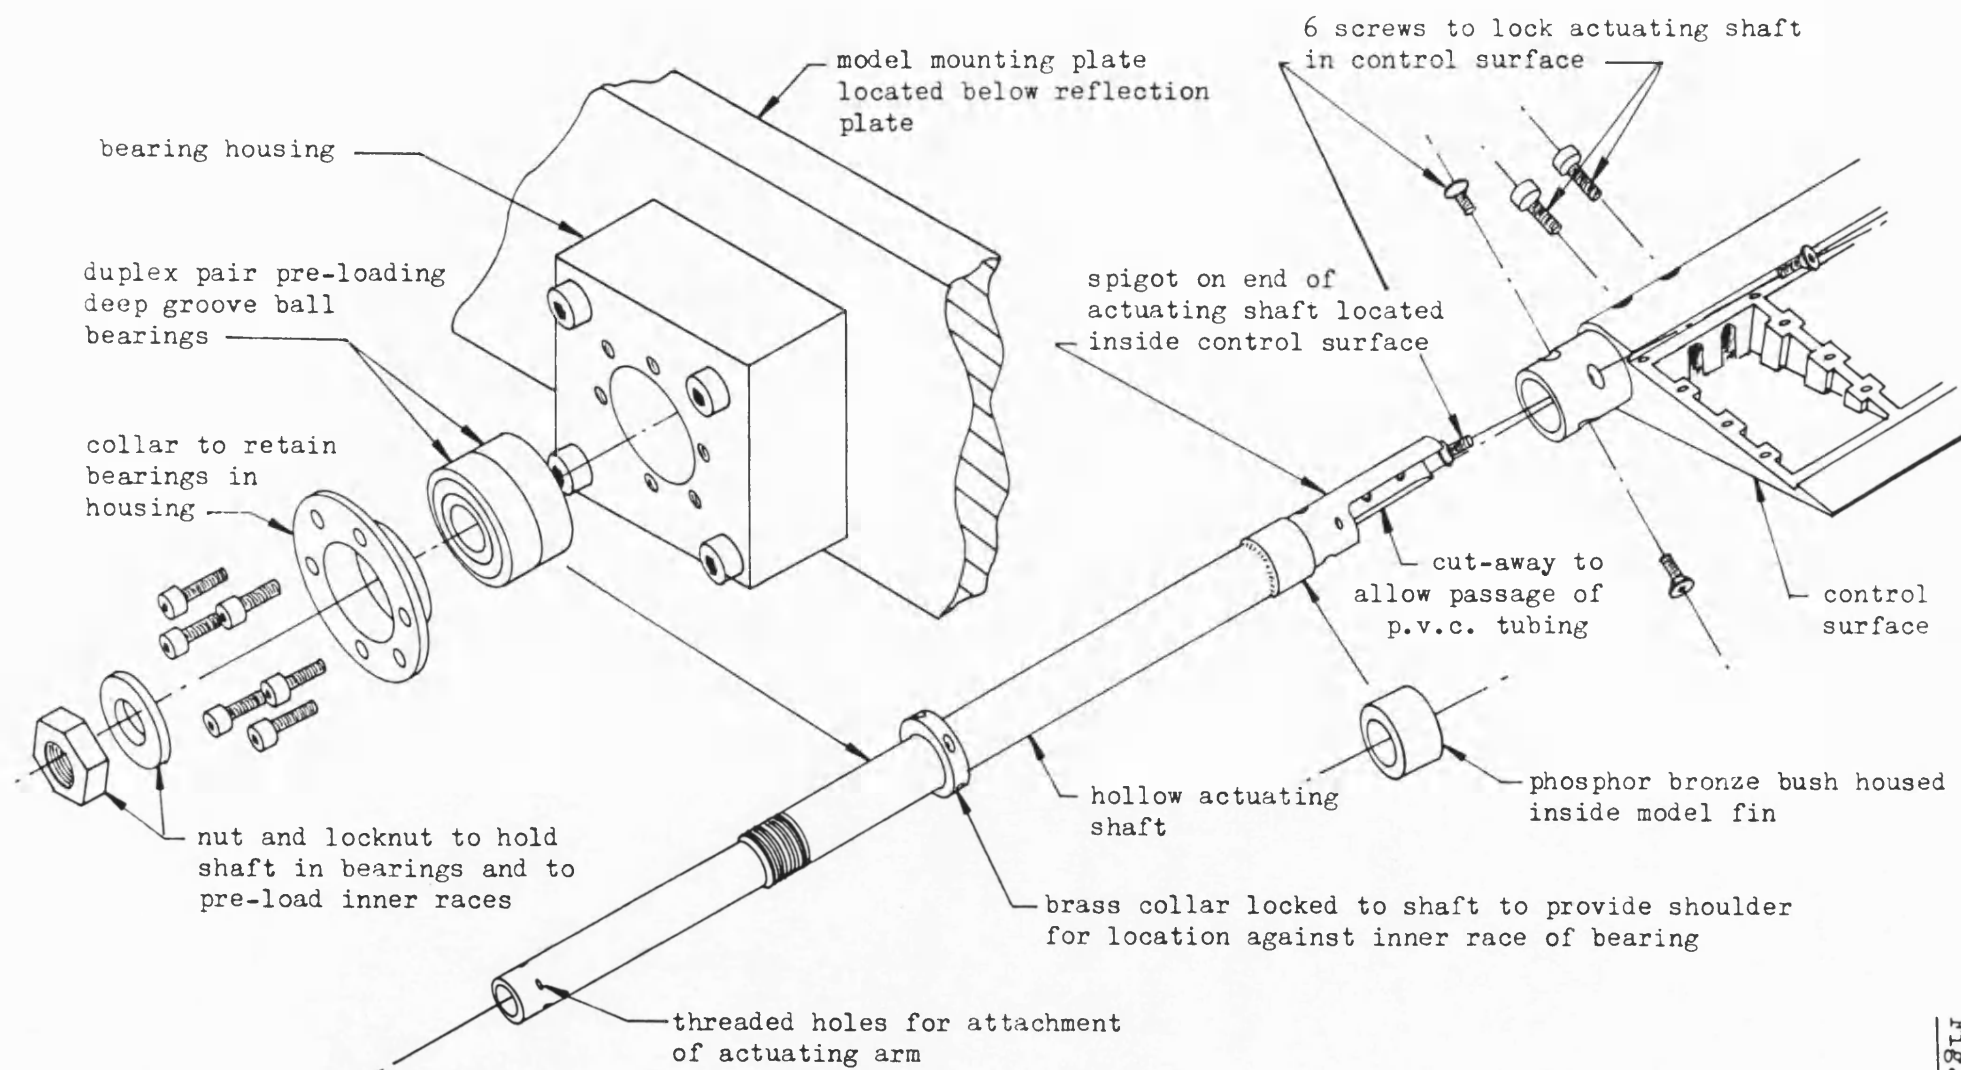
Details of spigot joint between control surface and actuating shaft.
